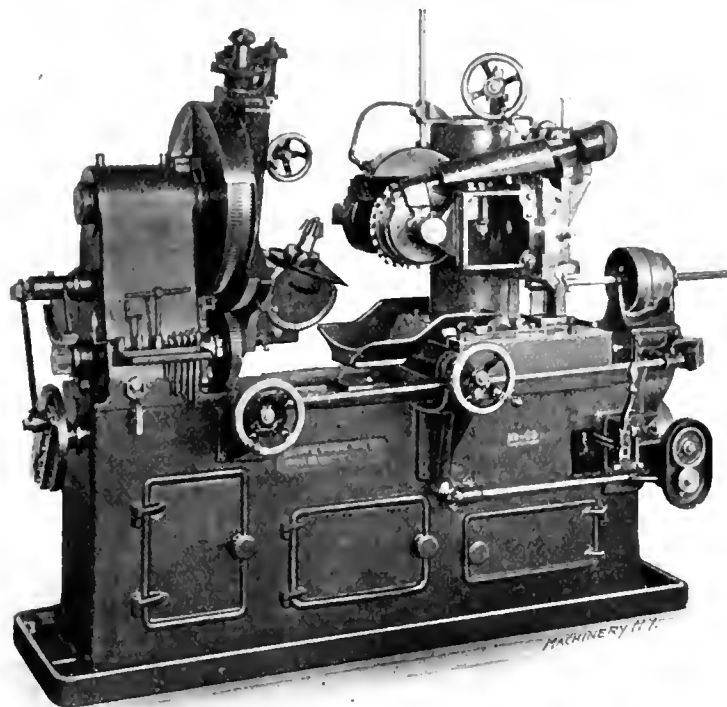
Brown & Sharpe Bevel Gear Generating Machine, cutting the Teeth by the Use of Interlocking Milling Cutters of Large Diameter.
